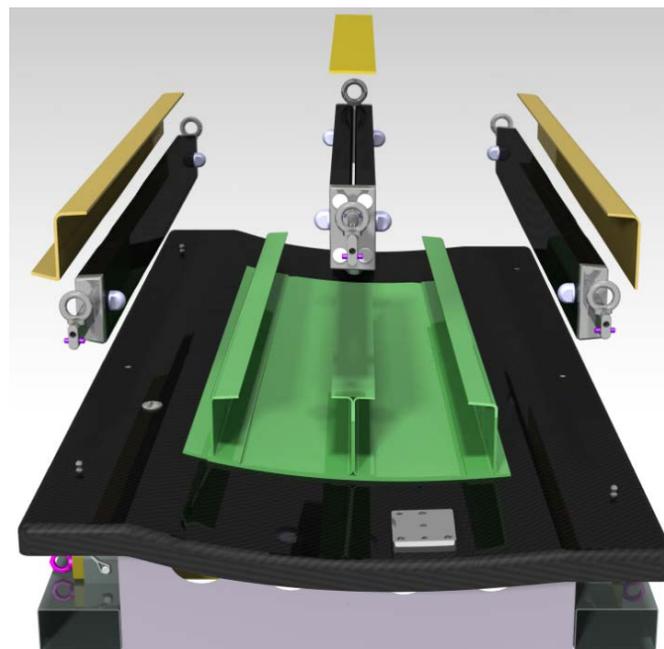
Bottom: Skin Tool with produced part. Upper: Spar Tool. Top: Caul plates. All components are CFRP-made
